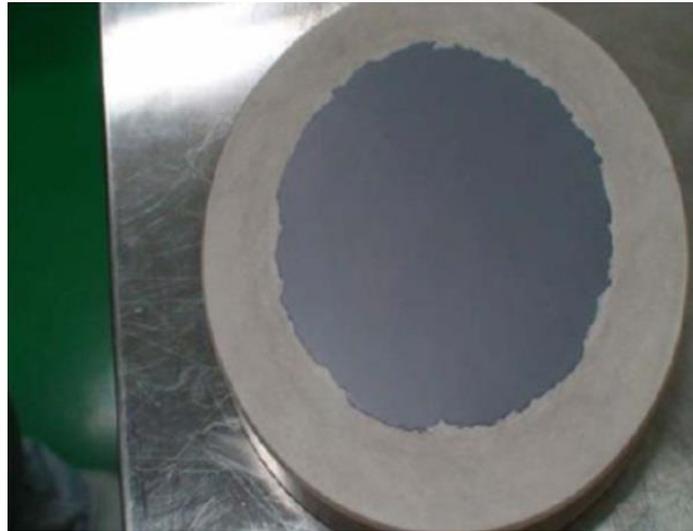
Wafer with rough surface after coarse mechanical grinding. To get higher speed grinding and thinner Si wafer all of the mechanical grinding is done with coarse grinding which results surface damage in the picture [13].
